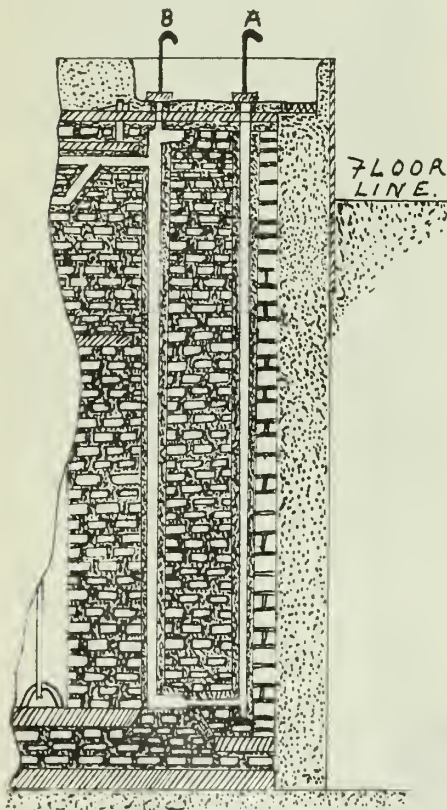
CROSS-SECTION VIEW OF CYLINDER, SHOWING GATES.
